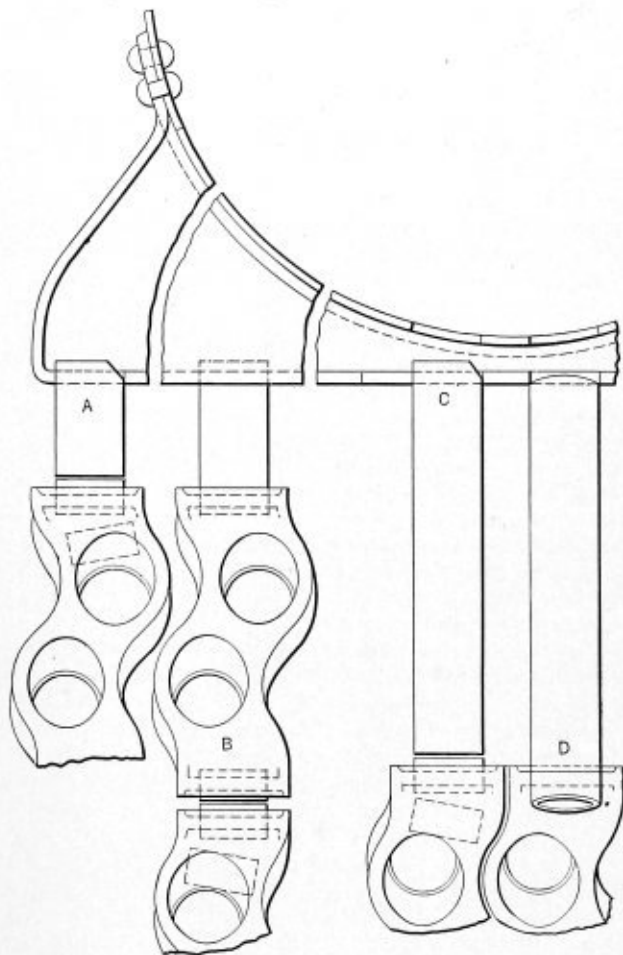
Showing Cutting of Front and Intermediate Nipples for Removal and Replacement
